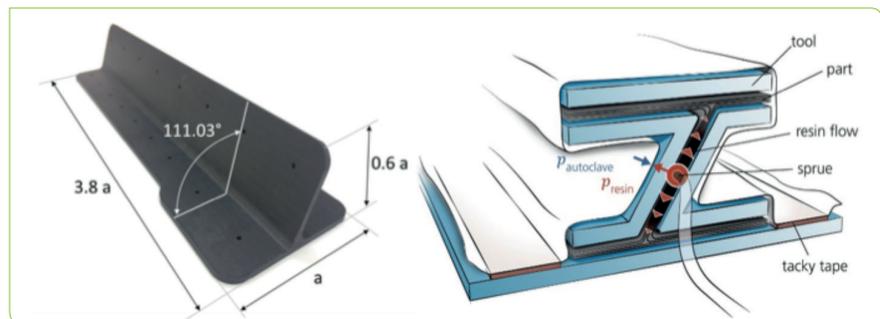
Composite stiffener dimensions (left) and the aluminium tool concept used (right)
